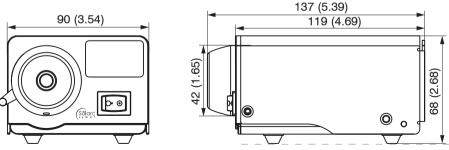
Endolight FOT Xenon light source - dimensional drawing
